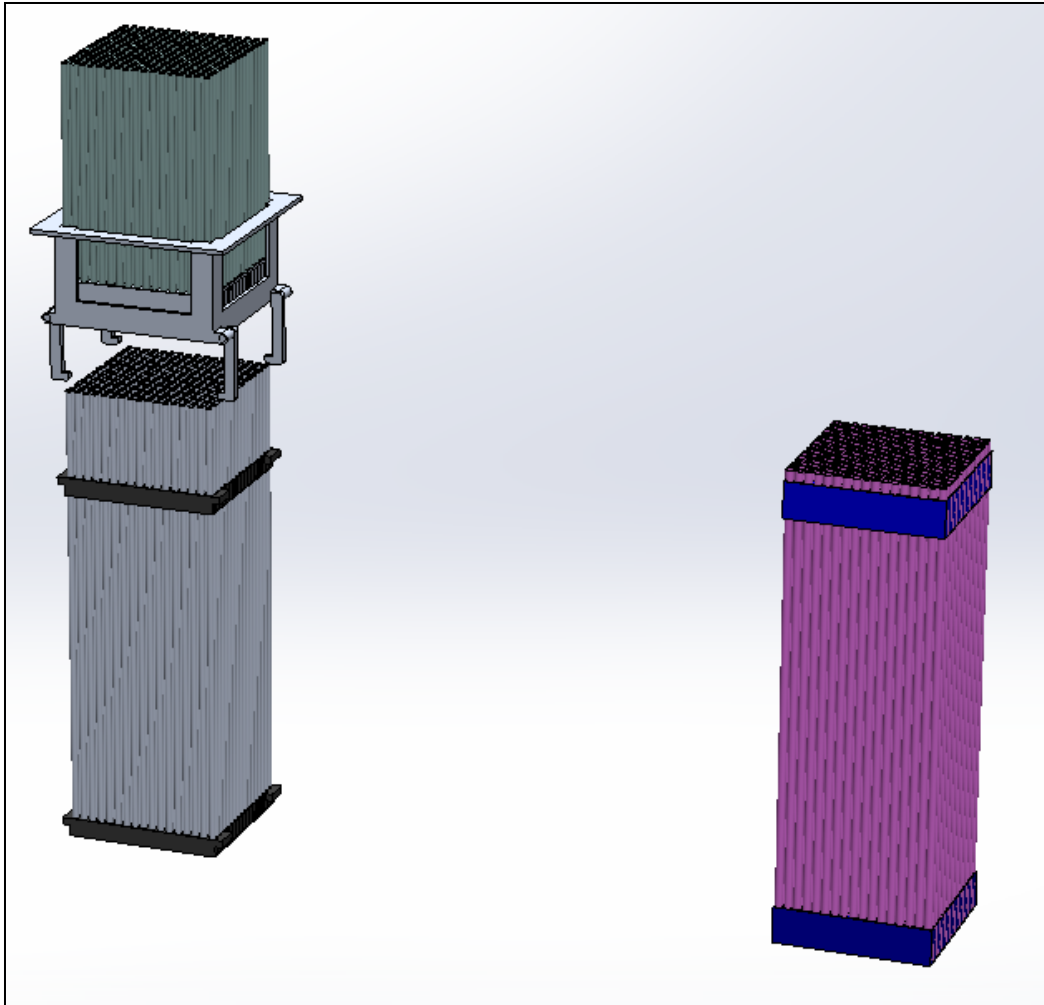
The lifting device about to pick up the fuel assembly, with the stainless steel tubes on the right side
